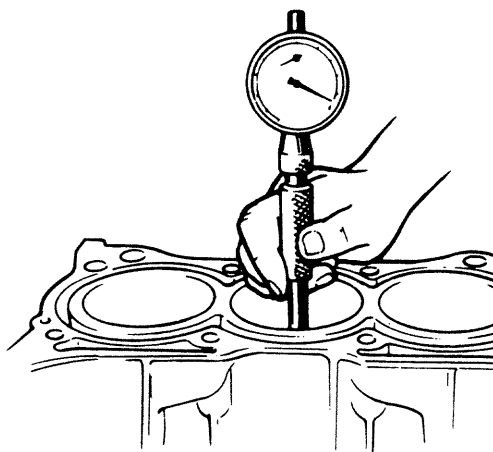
Measuring cylinder bore with cylinder gauge
